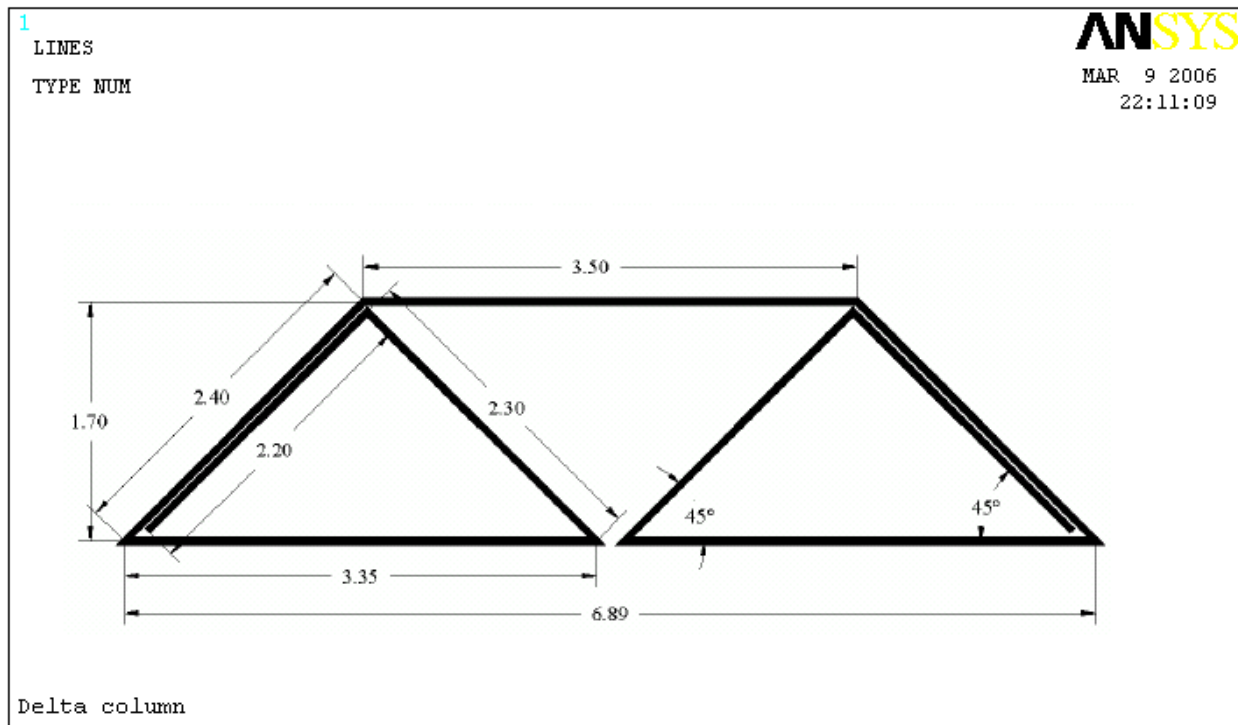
Cross-section of the Delta-shape column (unit: inches)
